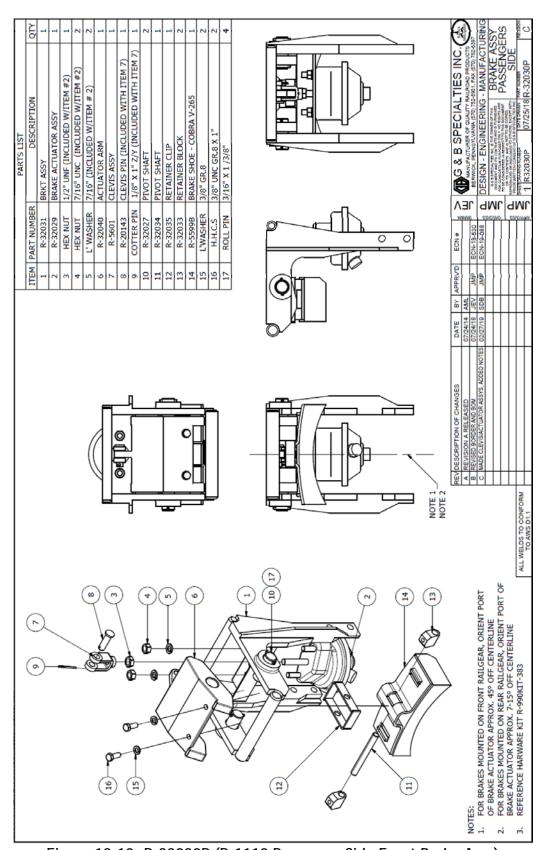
R-32030P (R-1110 Passenger Side Front Brake Assy)
